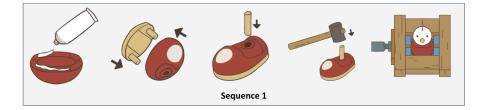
Toy assembly task sequence #1 (How to use compressor machine - 5 steps).
